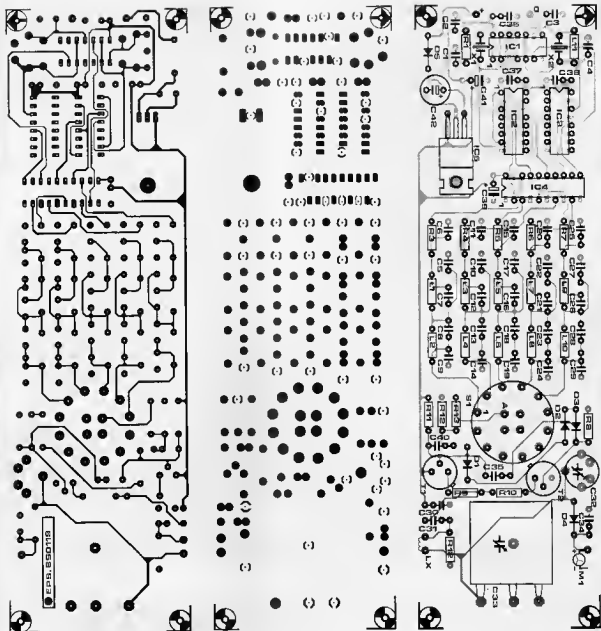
Track lay-outs and component mounting plan of the double-sided printed-circuit board for the RF induction meter.
